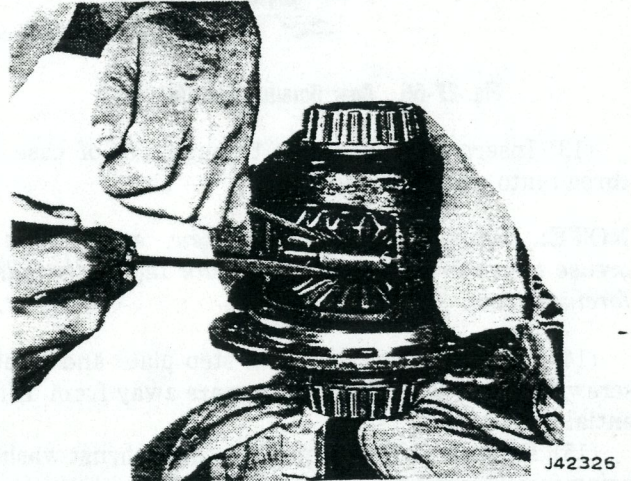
F-64 Pinion Mate Shaft Snap Ring Removal
